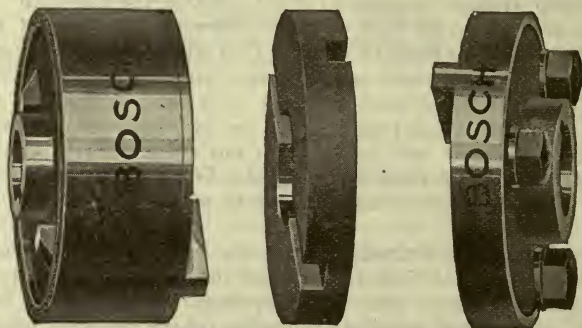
Type CG-83 Coupling Partly Disassembled.
